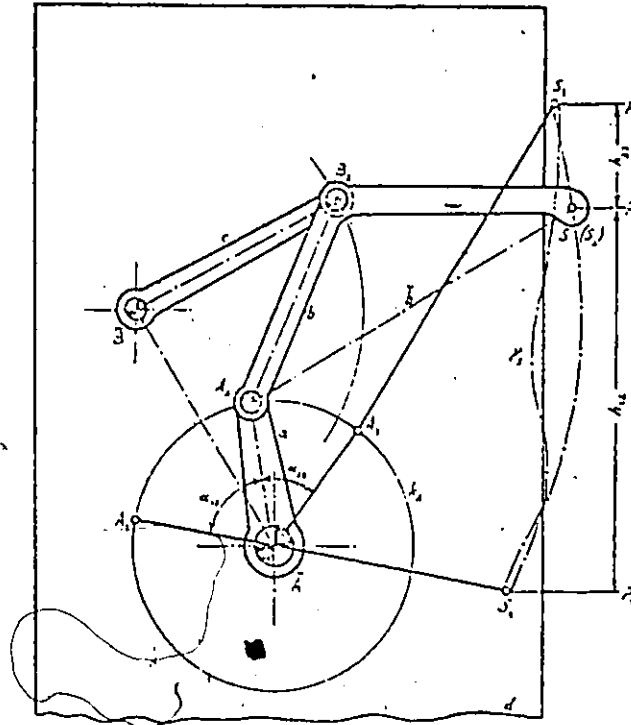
Three link positions of coupler AB of a 'threadfeeder mechanism for a sewing machine' corresponding to given coordinated angles of rotation α_{21}, α_{22} of the driving crank [3].
